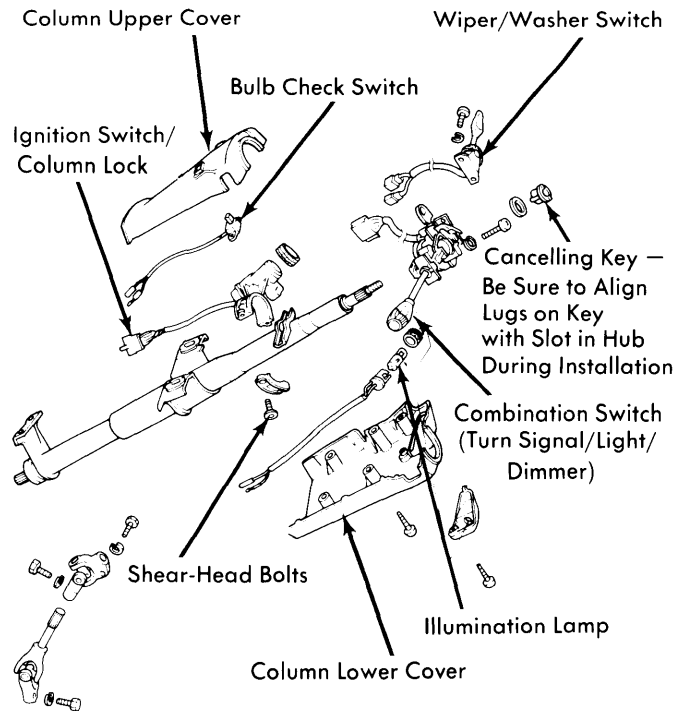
Disassembled View of Upper Column Components — Accord Shown; Others Similar
